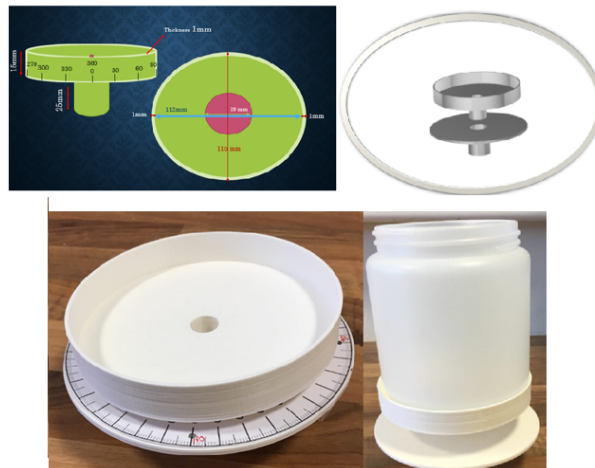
Designed and fabricated phantom holder using 3D printing.
